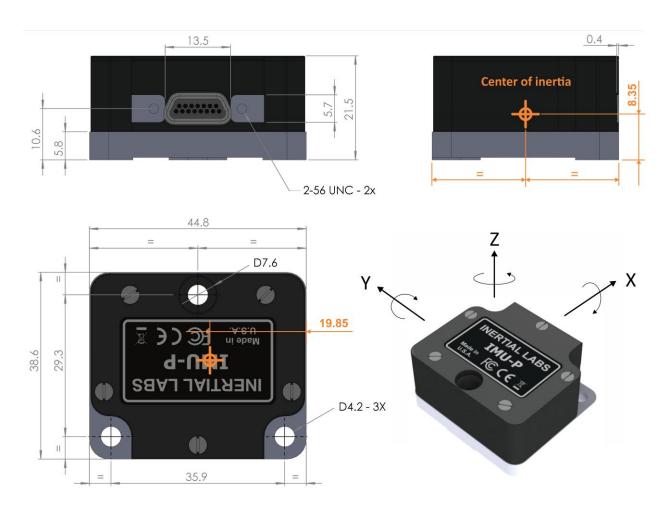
The Inertial Labs[™] IMU-P outline drawing (all dimensions are in millimetres)
